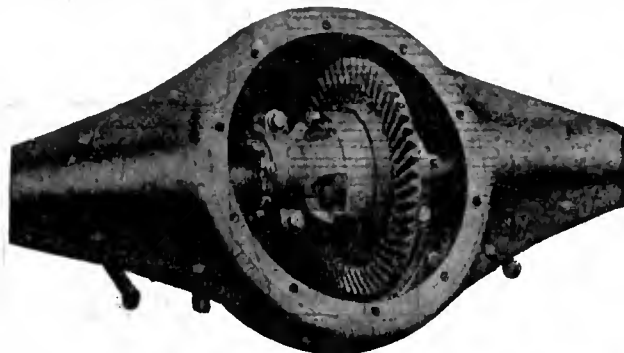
Central part of a rear axle with inspection cover removed, showing spiral bevel gear.
